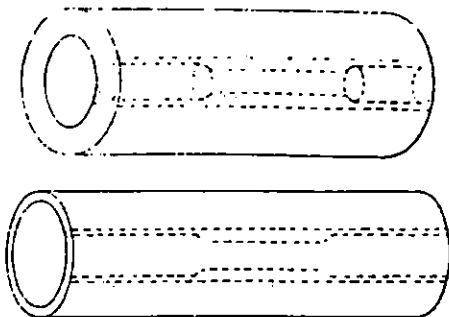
Squeezing Jig for Flattening Ends of Full-Size Tension Test Specimens
